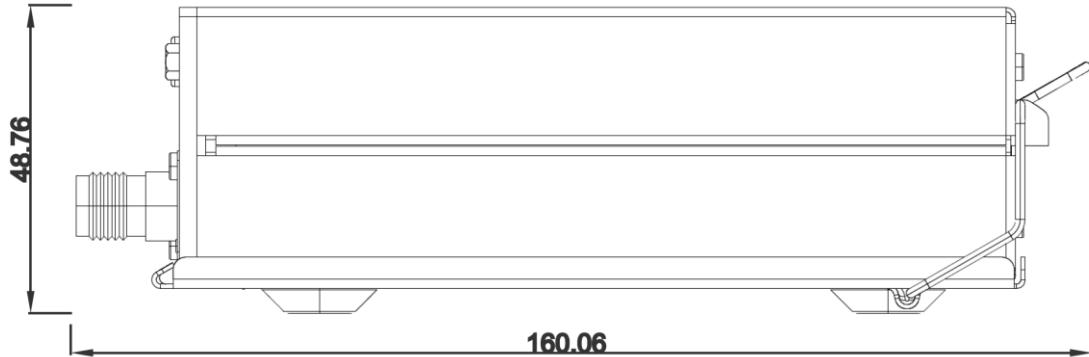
SV-XPNDR-261, Mounting Dimensions in MM
